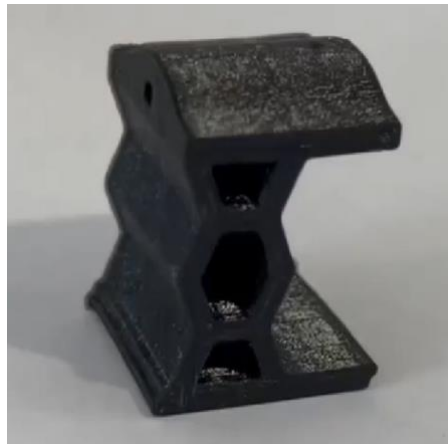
TPU95A 3D printed honeycomb spoke. Upper area was designed to fit into the wheelchair wheel rim. A hole was designed to accommodate a wire to tightly hold it onto the wheel.
